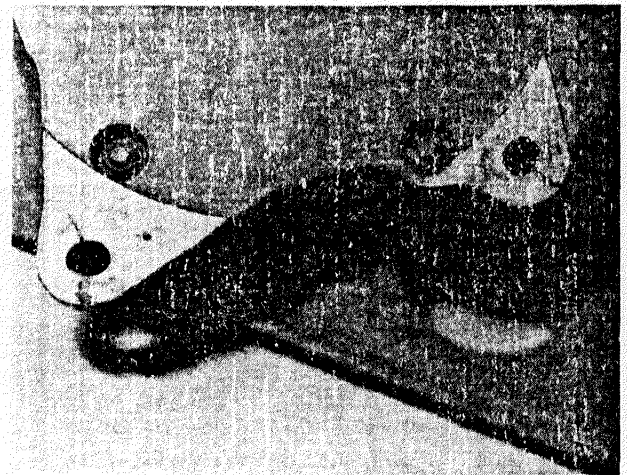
Port aft bulkhead latch gang power drive unit (STS-3)
